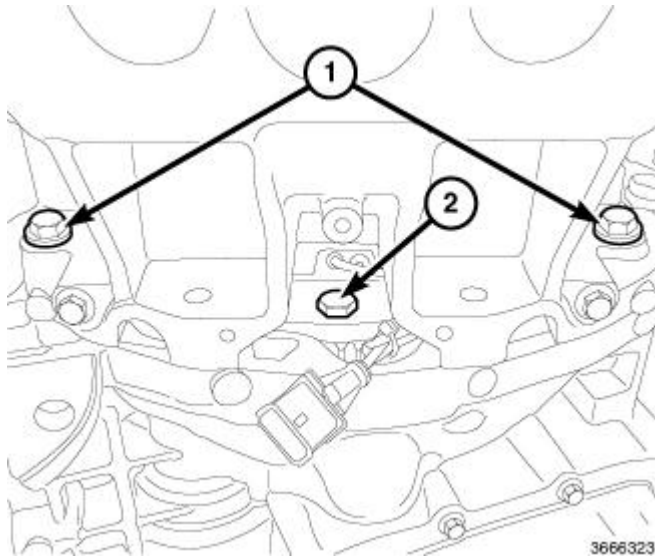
Oil Pan To Transaxle Bolts & Flex Plate-To-Torque Converter Bolts
